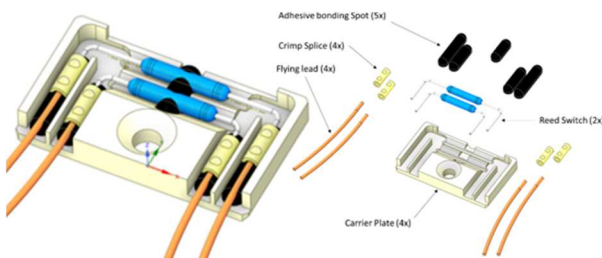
Components Breakdown of a redundant Reed Switch Assembly
